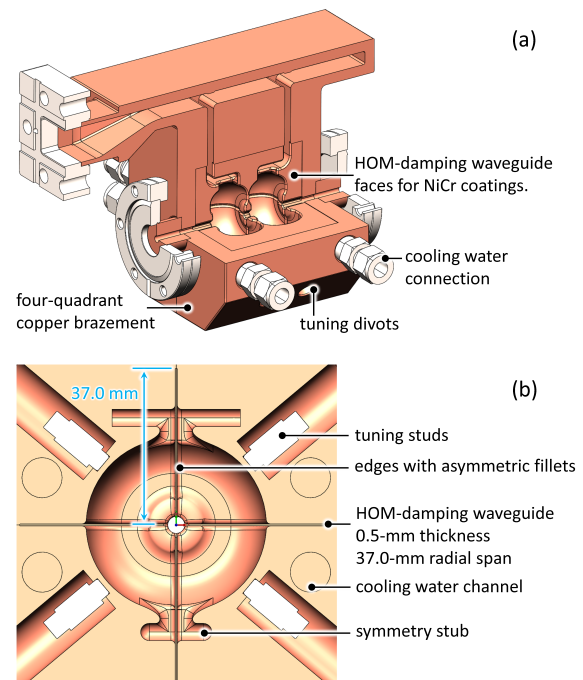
Mechanical design of the two-cell accelerator cavity with HOM-damping waveguides. (a) three-quarter section view; (b) half-section view of one cell.
